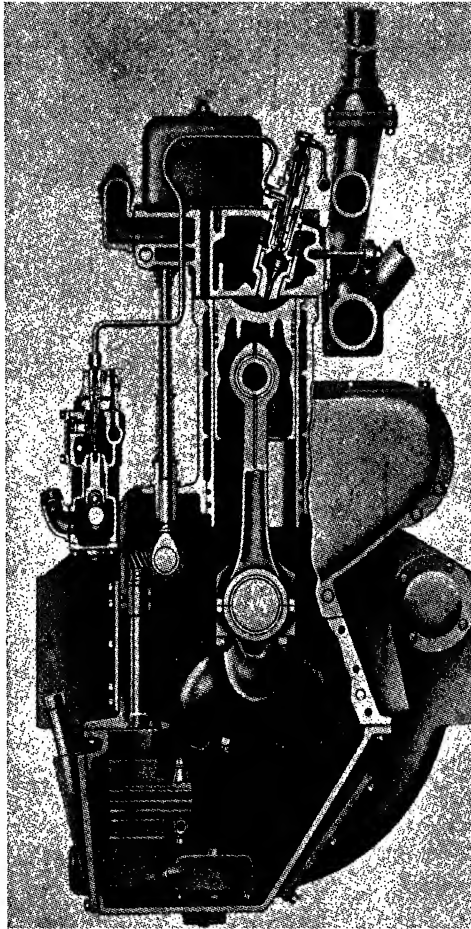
Cross-section of Diesel engine. (Courtesy Caterpillar Tractor Co.)
